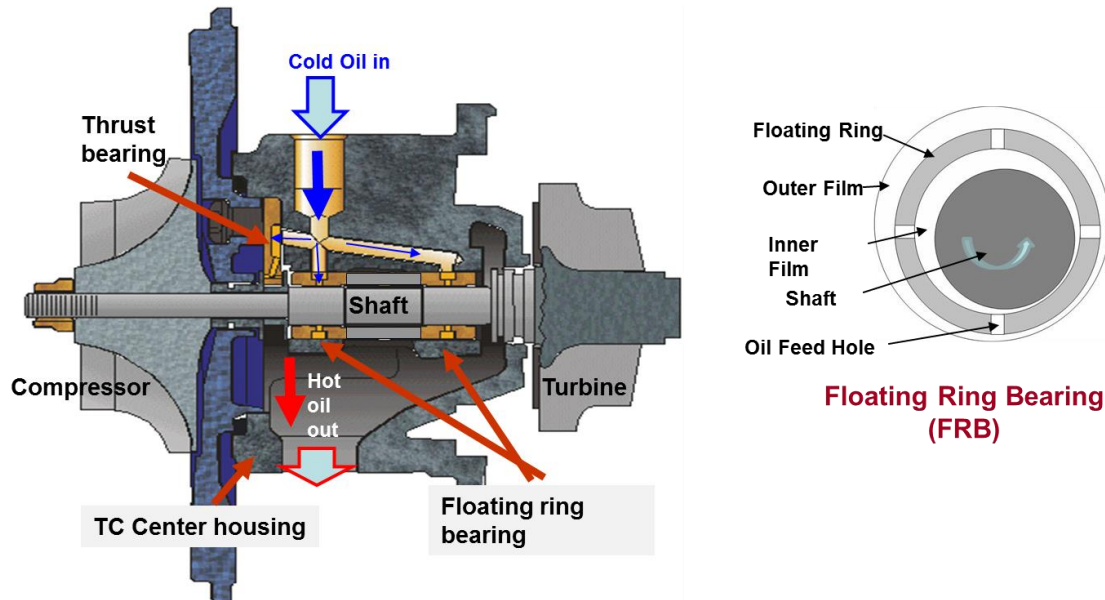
Cross section of passenger vehicle turbocharger and schematic view of floating ring bearing
